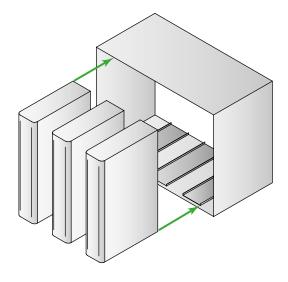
Slide the splitters into the mounting rails with the rounded side facing the inlet.
